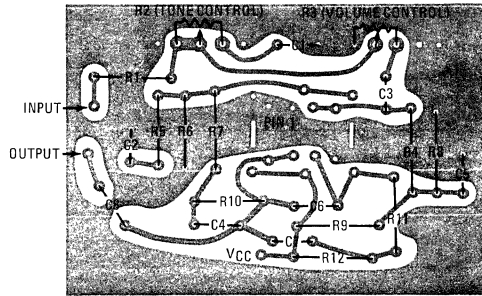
PRINTED CIRCUIT BOARD (Foil Side)
